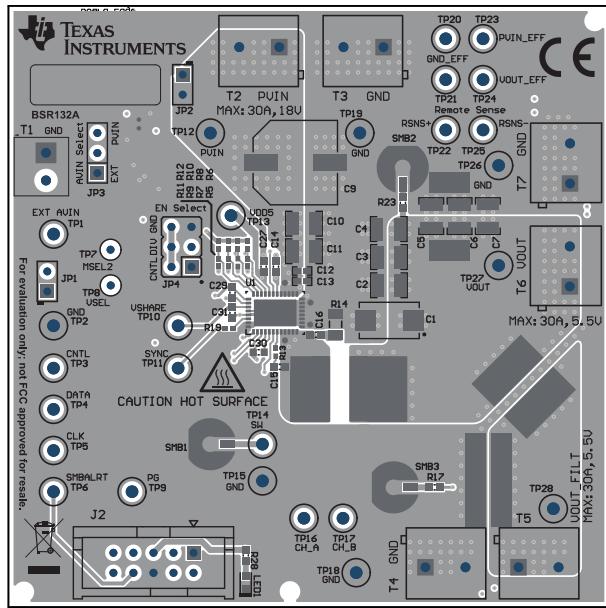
TPS546A24AEVM-1PH Top Side Component View (Top View)
